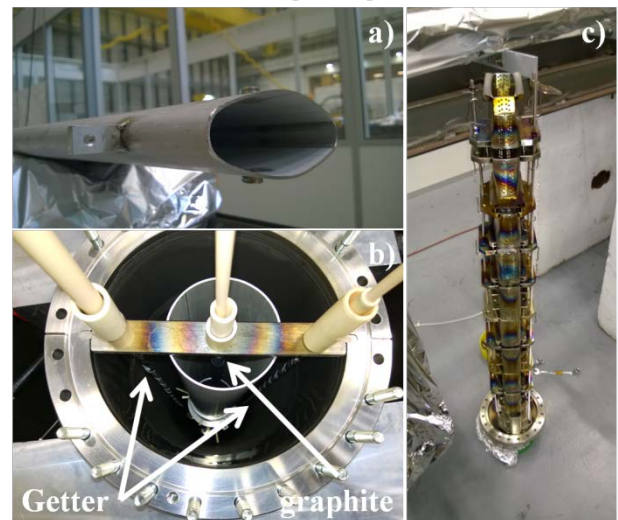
Parts coated by magnetron sputtering in cylindrical configuration: a) QF type chamber; b) QD type; c) assembly of 10 RF pumping port shields to coat.
